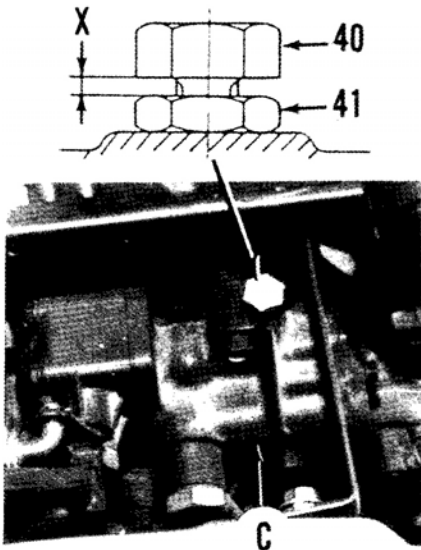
View showing adjuster screw (40) and locknut (41) located in control valve (C). Clearance (X) is adjusted to control implement lowering speed. Refer to text.
